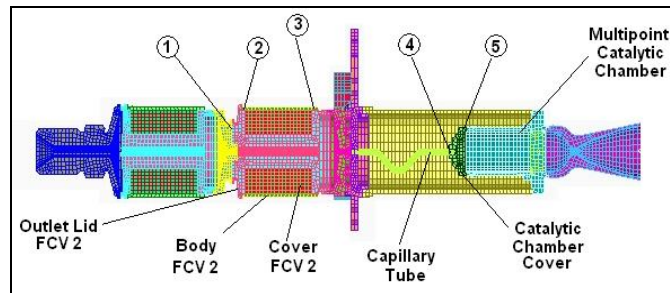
Component Material and Definition Assignment of the Welding Regions
